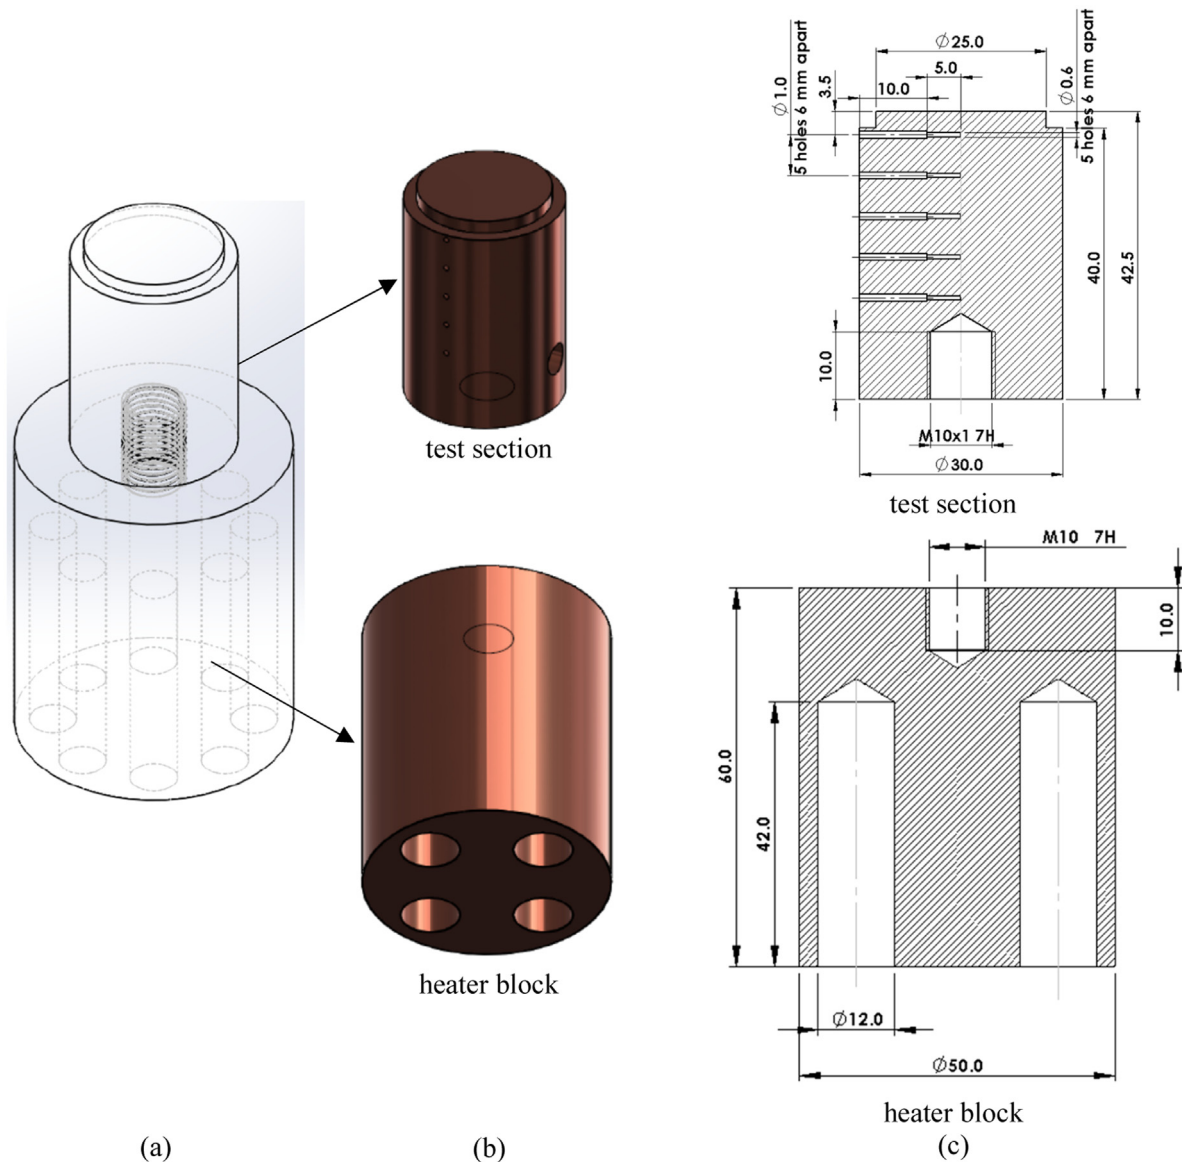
(a) Schematic drawing of the experimental facility, (b) exploded view of the test section, and (c) the test section assembly.
